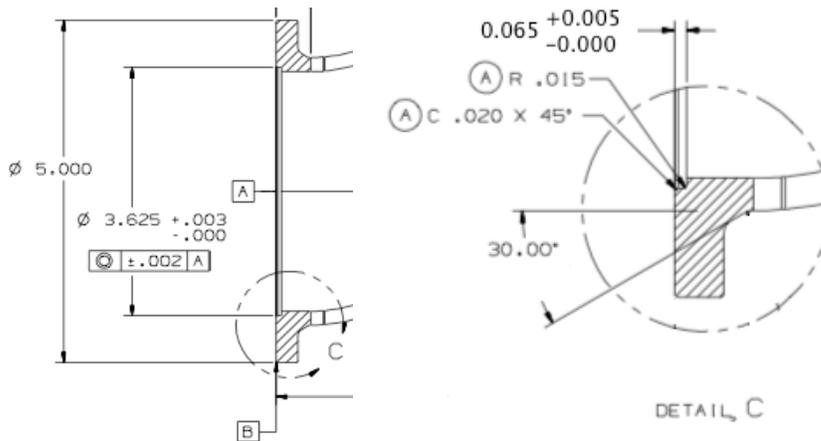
PARTID D2A2—REFERENCE DRAWING OF UPSTREAM FLANGE DETAILS FROM SIMILAR PART
